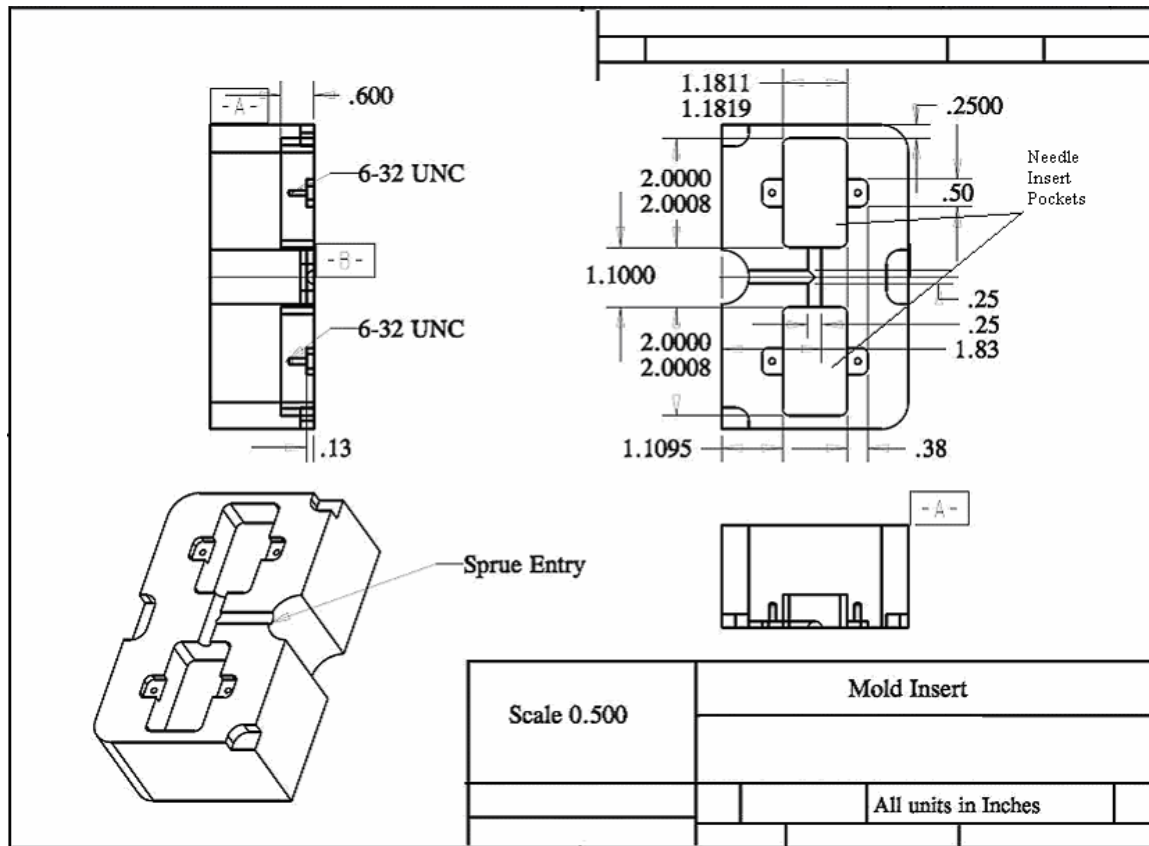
Large mold section into which smaller inserts are placed. (Drawing courtesy of Taylor Stellman)
